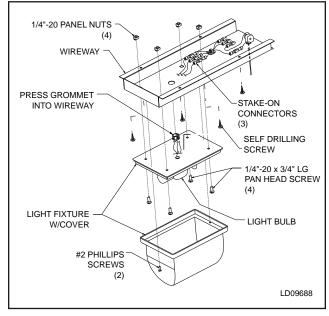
LIGHT ASSEMBLY PULL SWITCH SHOWN)
